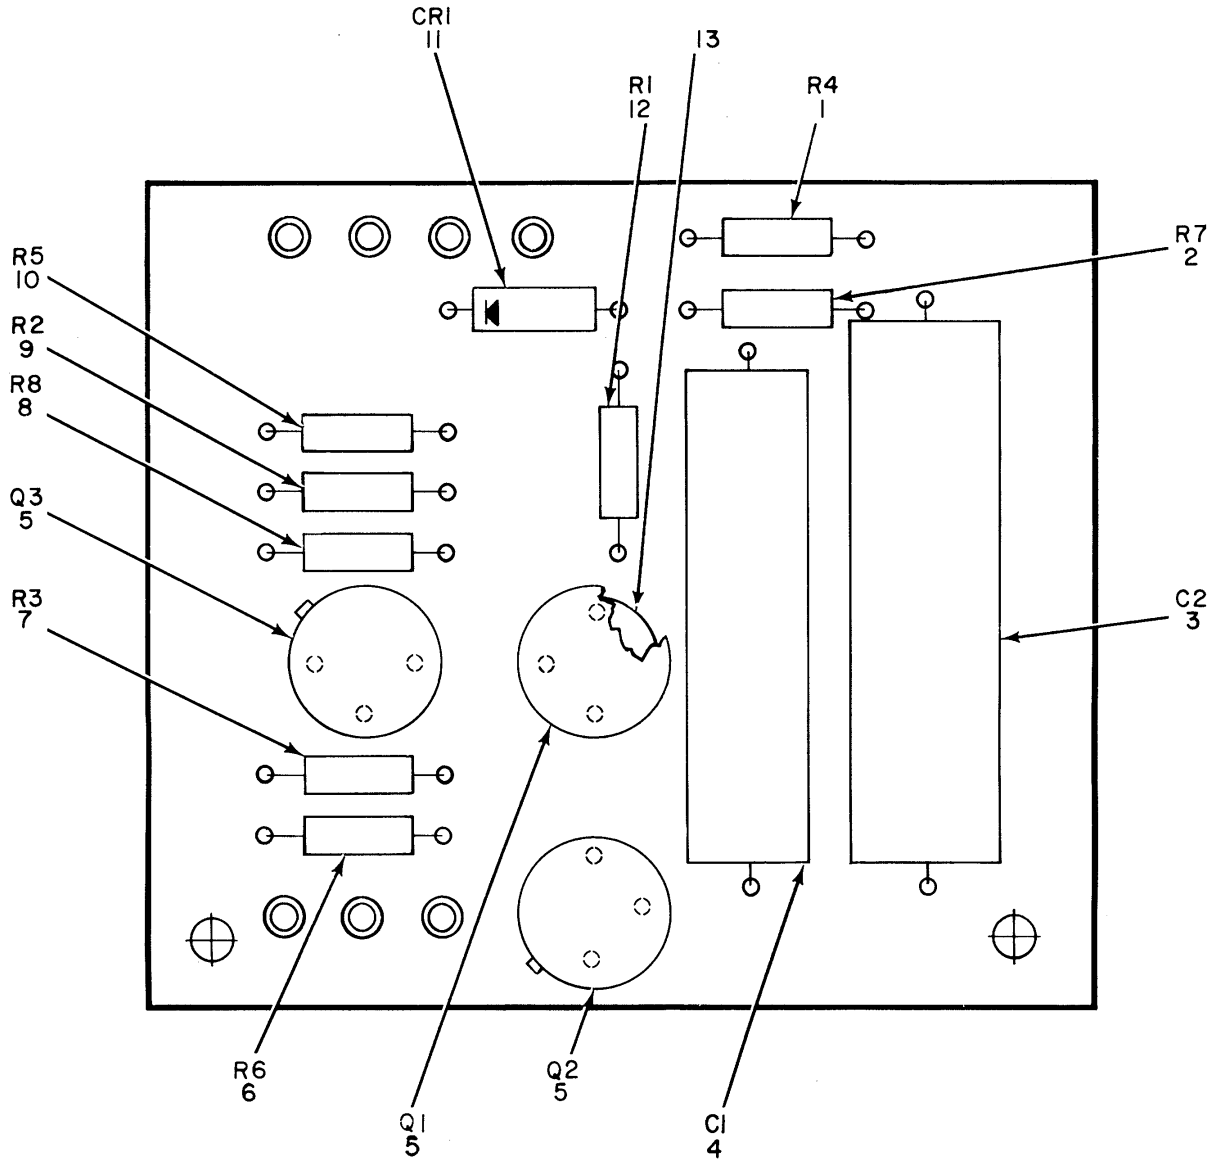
Printed Circuit Boards, Driver Board Assembly.
